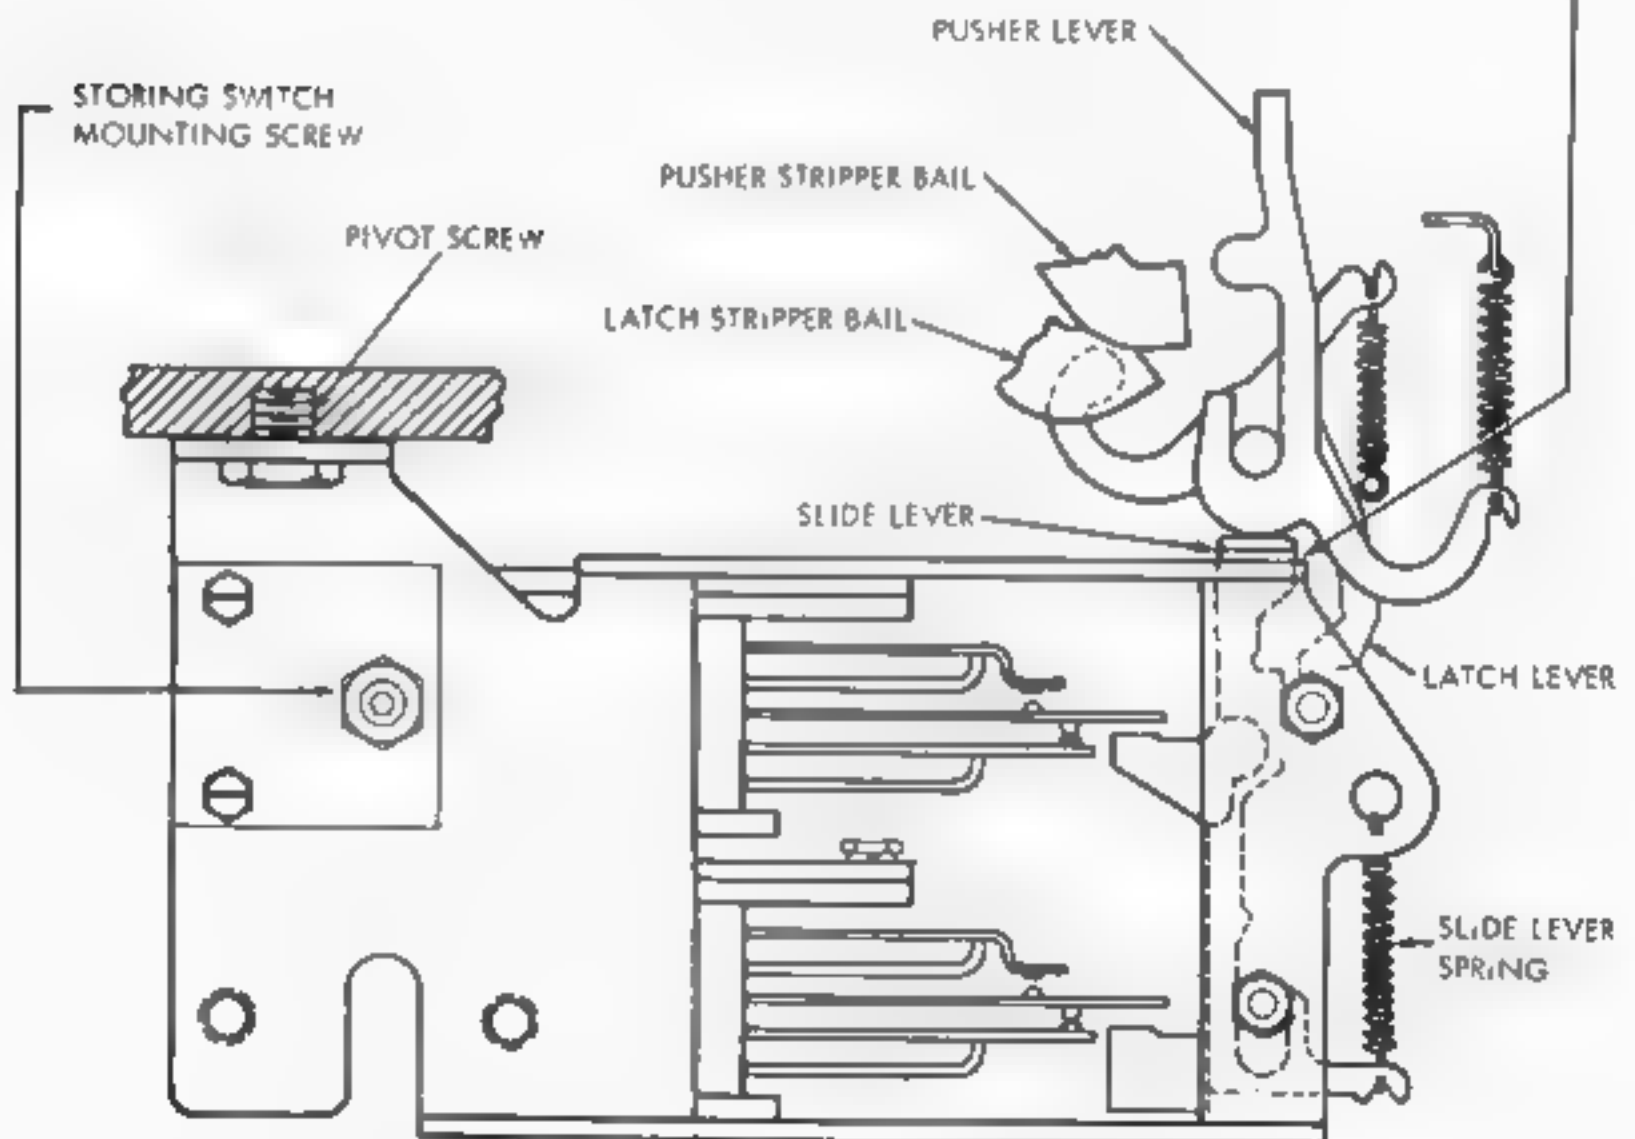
TRANSFER TYPE STORING SWITCH MECHANISM
